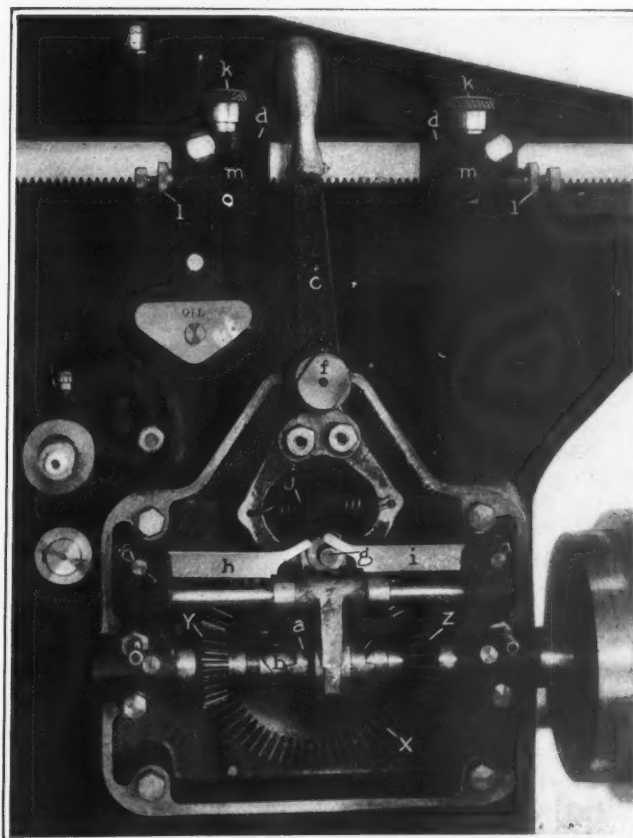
Slide Controlling Mechanism with Cover Plate removed
